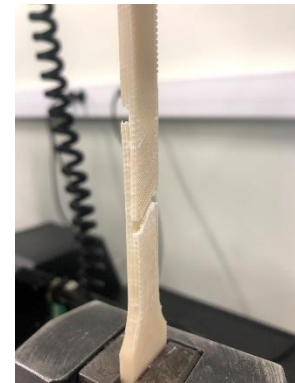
Premature fracture of a tensile bone with defects due to problem of under-extrusion.
